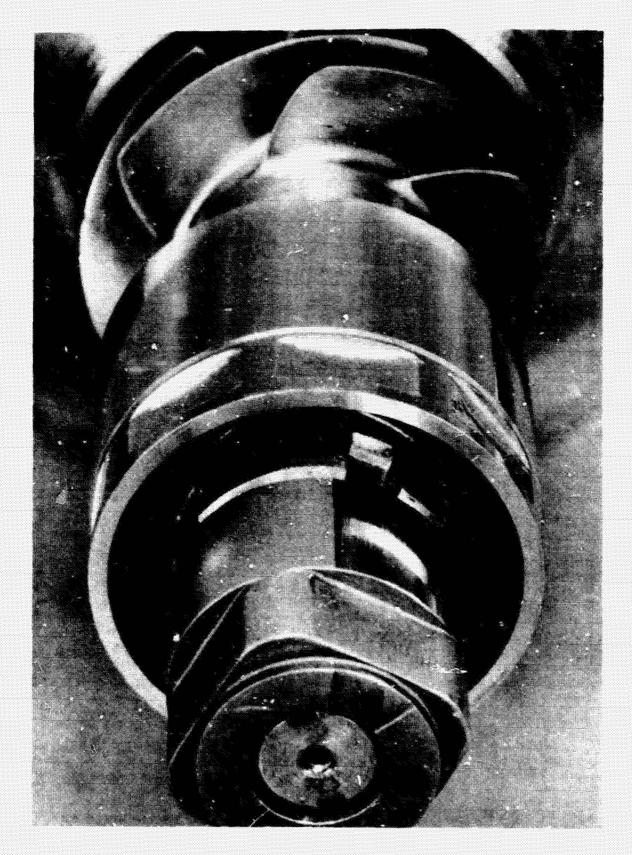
Pump End of Rotating Assembly - Instrumentation Nut, Cartridge, and Inducer
